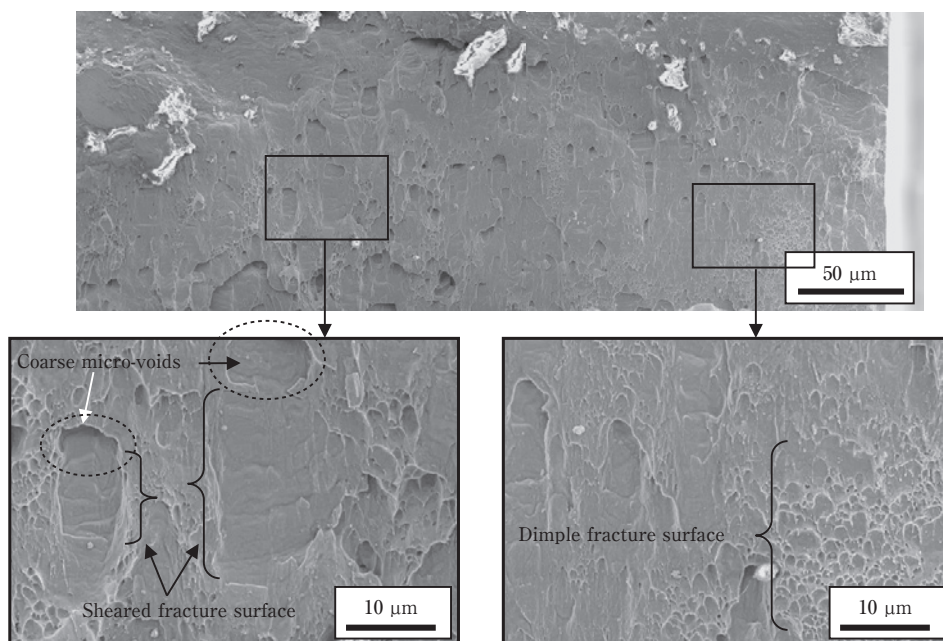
Fracture surface morphology at the fracture area.
